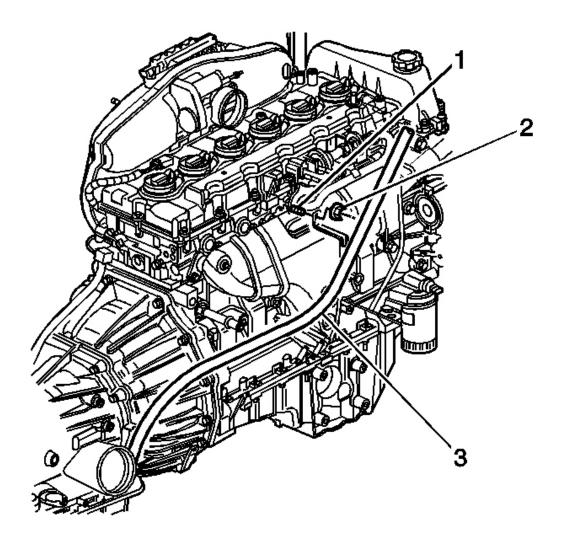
View Of Filler Tube, Nut & Stud Courtesy of GENERAL MOTORS CORP.
